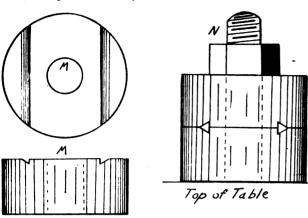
SHOWING COLLARS AND METHOD OF USING ON SHAPER.
